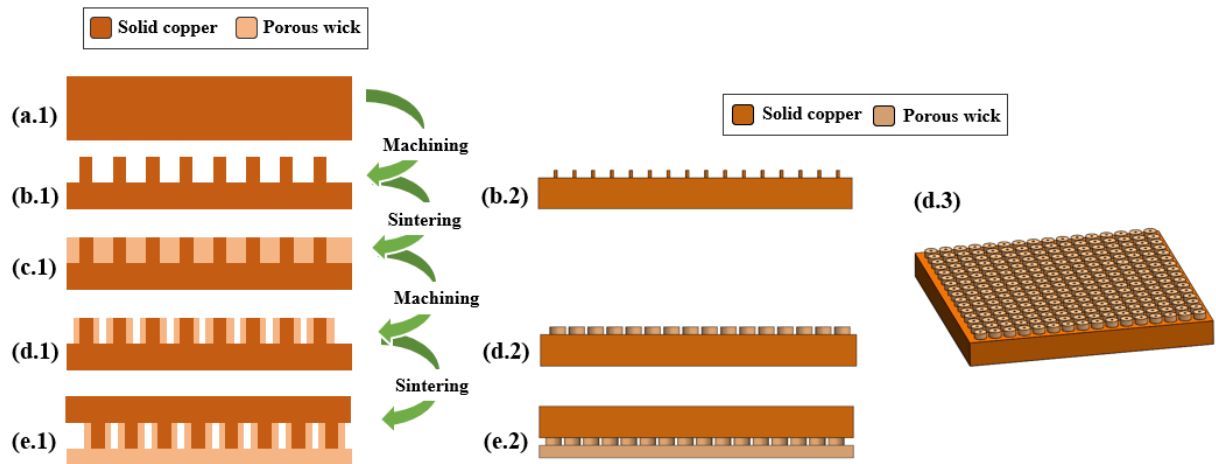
(a.1 – e.1) Proposed manufacturing sequence for a surface area enhancement evaporator with a circular face. (b.2 – e.2) Lateral views for the 3D model at the second, fourth and last stage of the proposed manufacturing process. (d.3) Isometric 3D view for the third step in the manufacturing process proposal.
